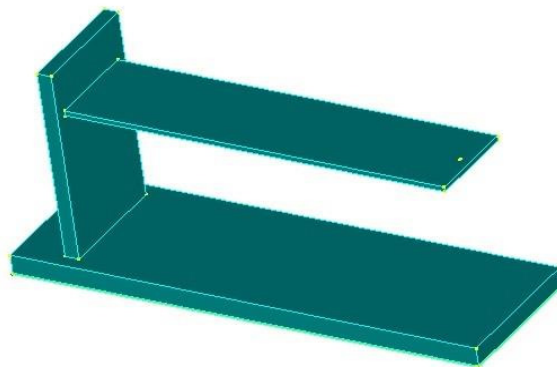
Load cell 3D-CAD of cantilever beam type structure subjected to end vertical downward load
